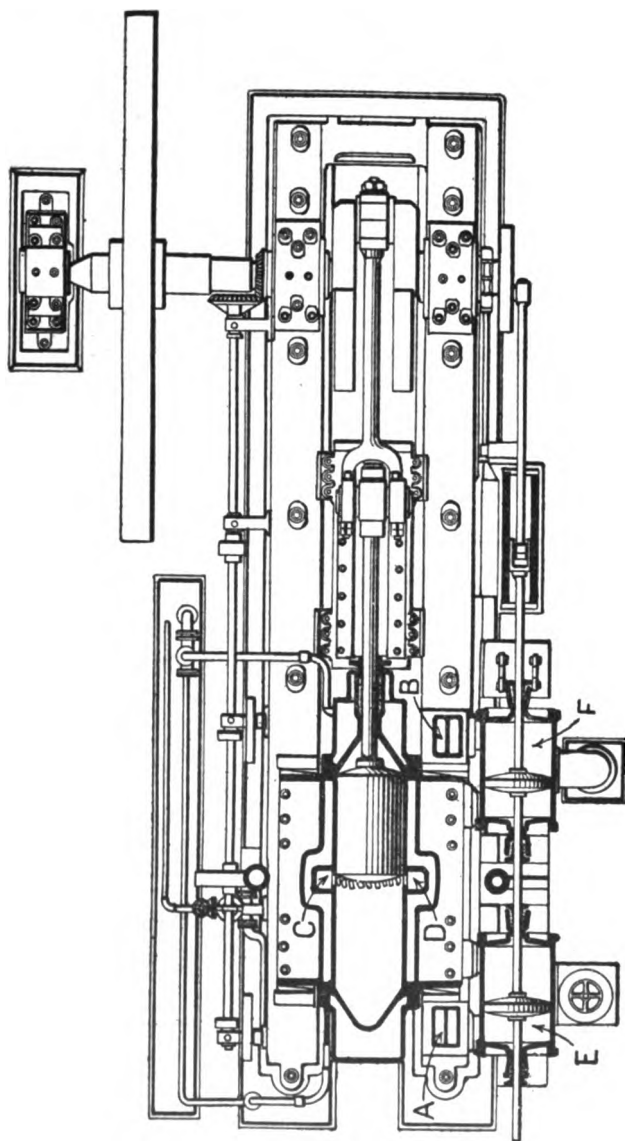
KOERTING ENGINE, Sectional Plan.
